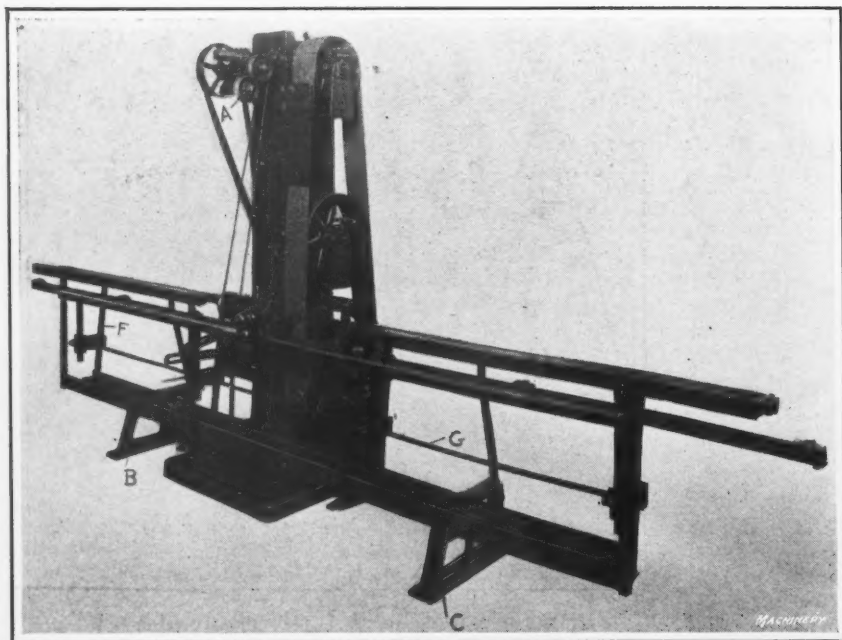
Blevney Abrasive Belt Polishing Machine equipped with Attachment for handling Tubing
